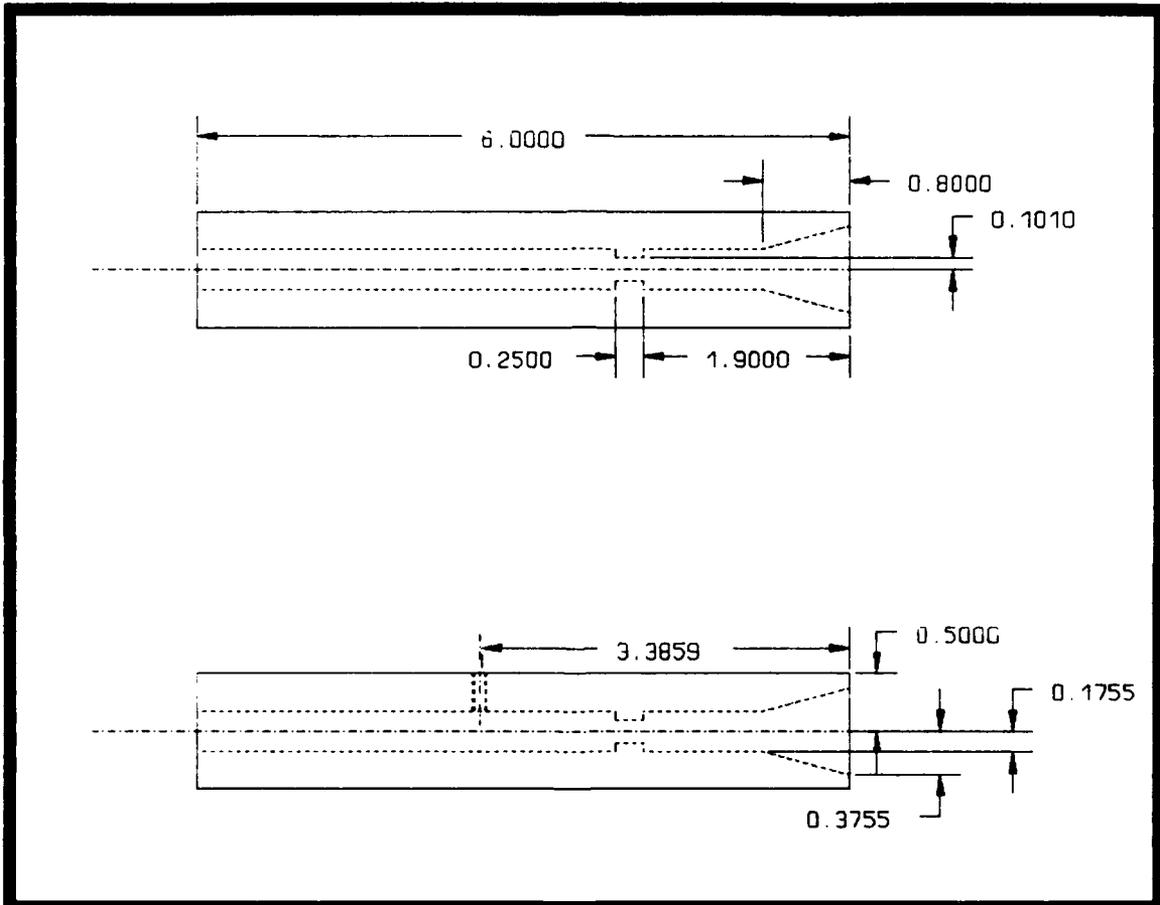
Dimensions of the collet holder (Dimensions are in inches).
